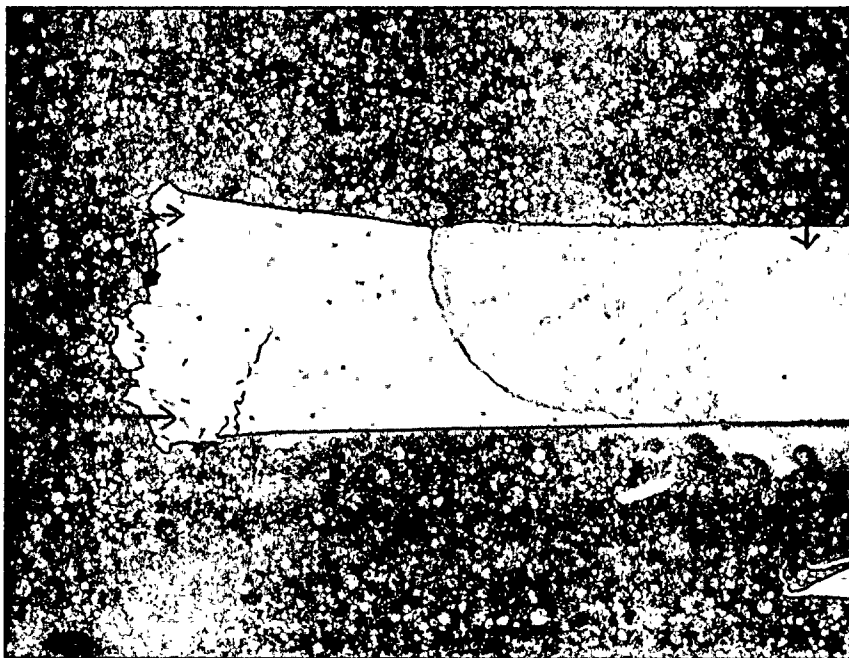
O.D. surface of Section A-1 after breaking open to reveal fracture surface, Oxalic Acid Etch. 15X
